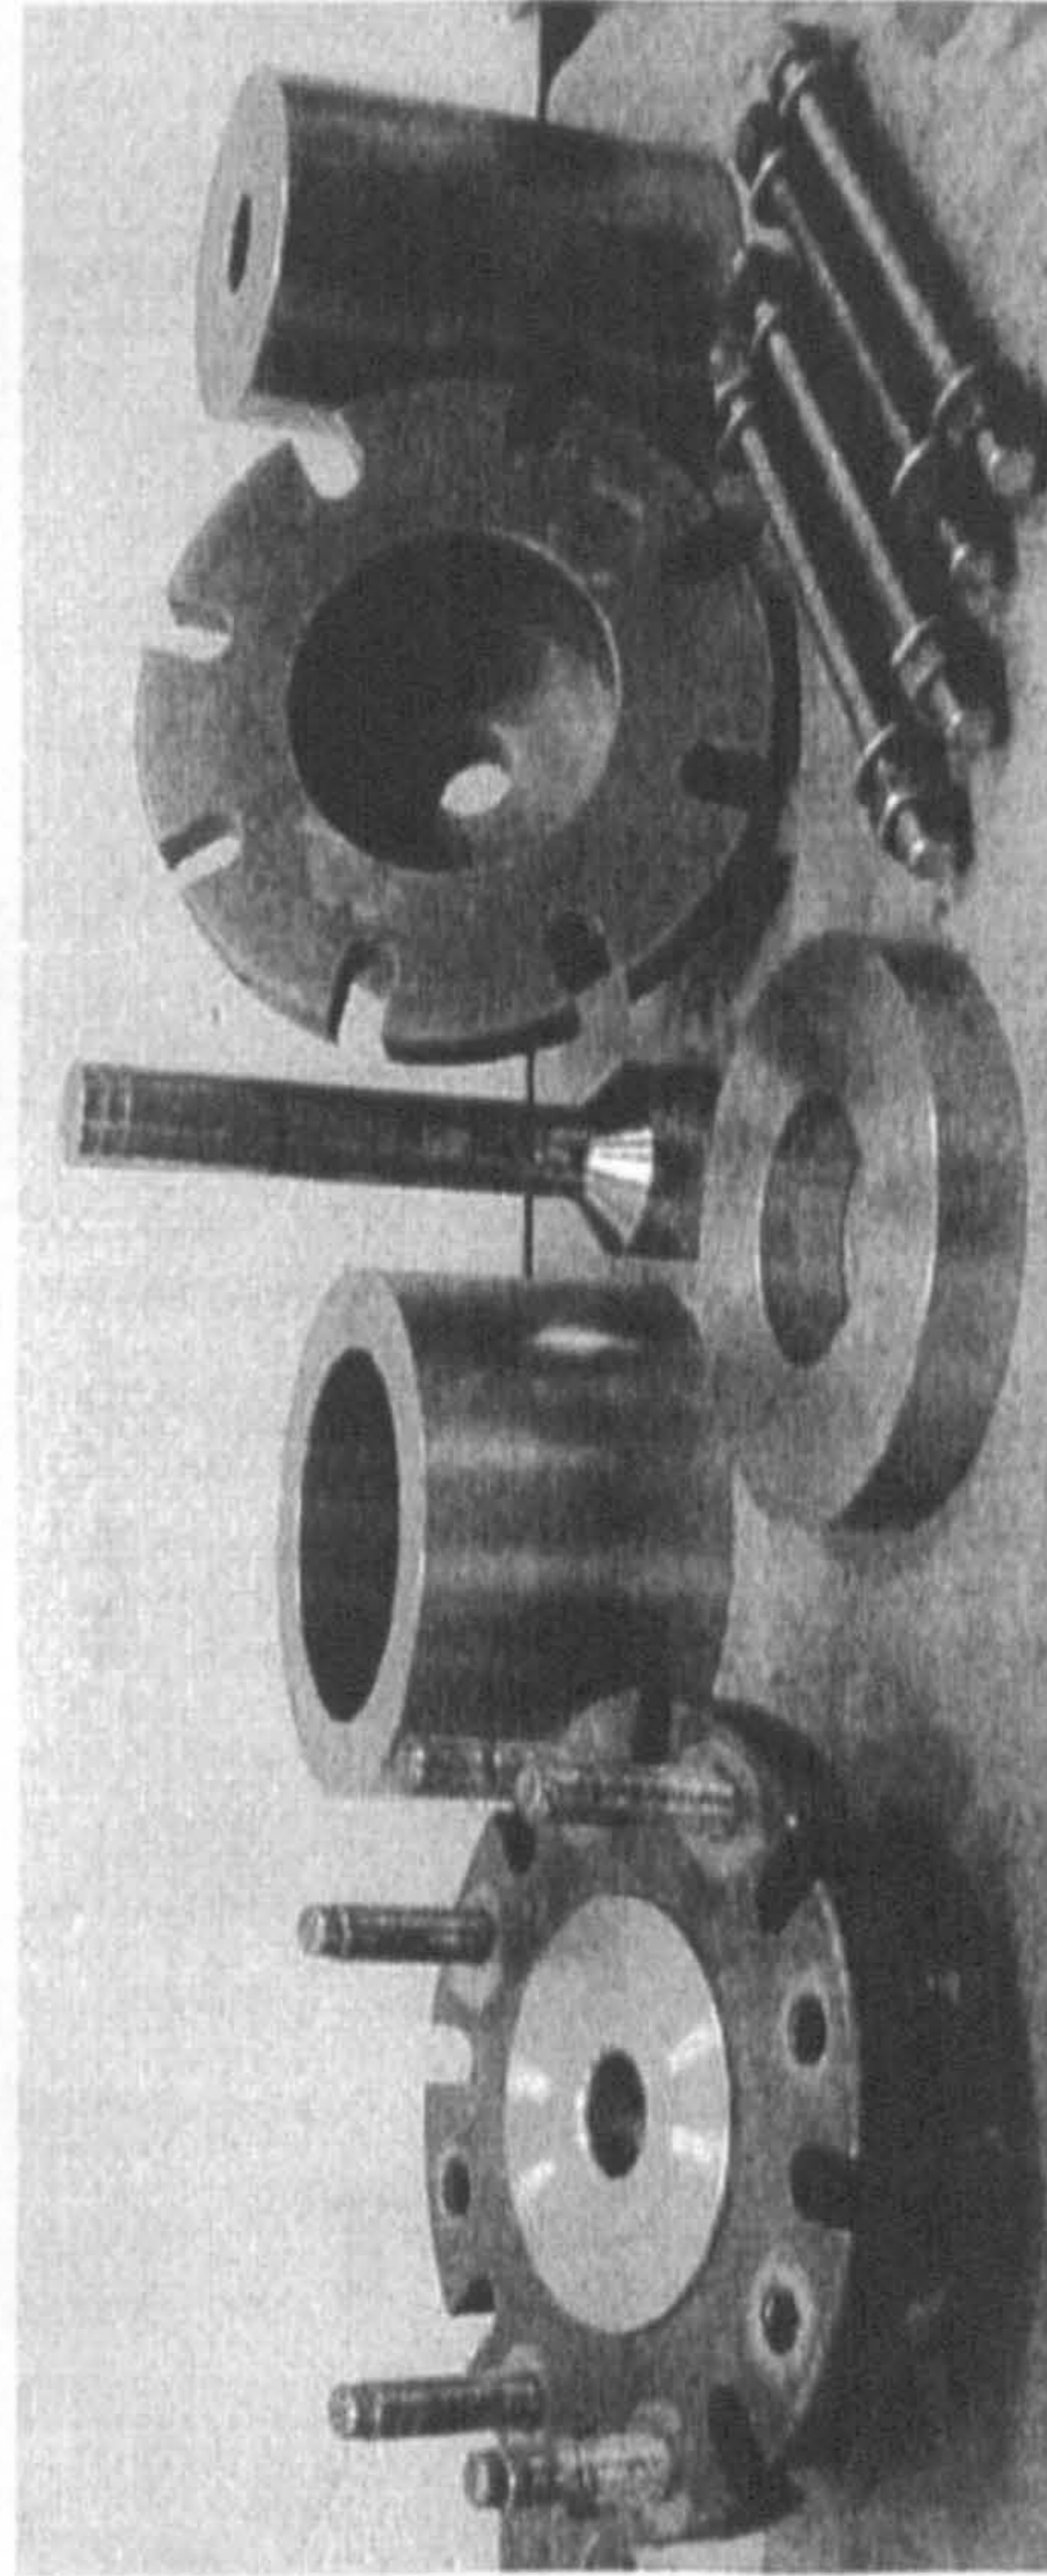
The equipment used for the forming of hollow flanges with PAIF
